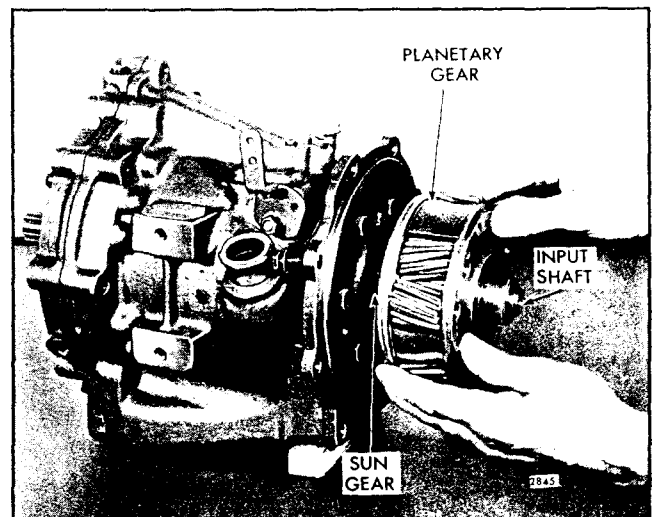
Removing or Installing Reduction Gear Planetary Gear Assembly from/on Sun Gear and Input Shaft (2.1:1 Ratio)
